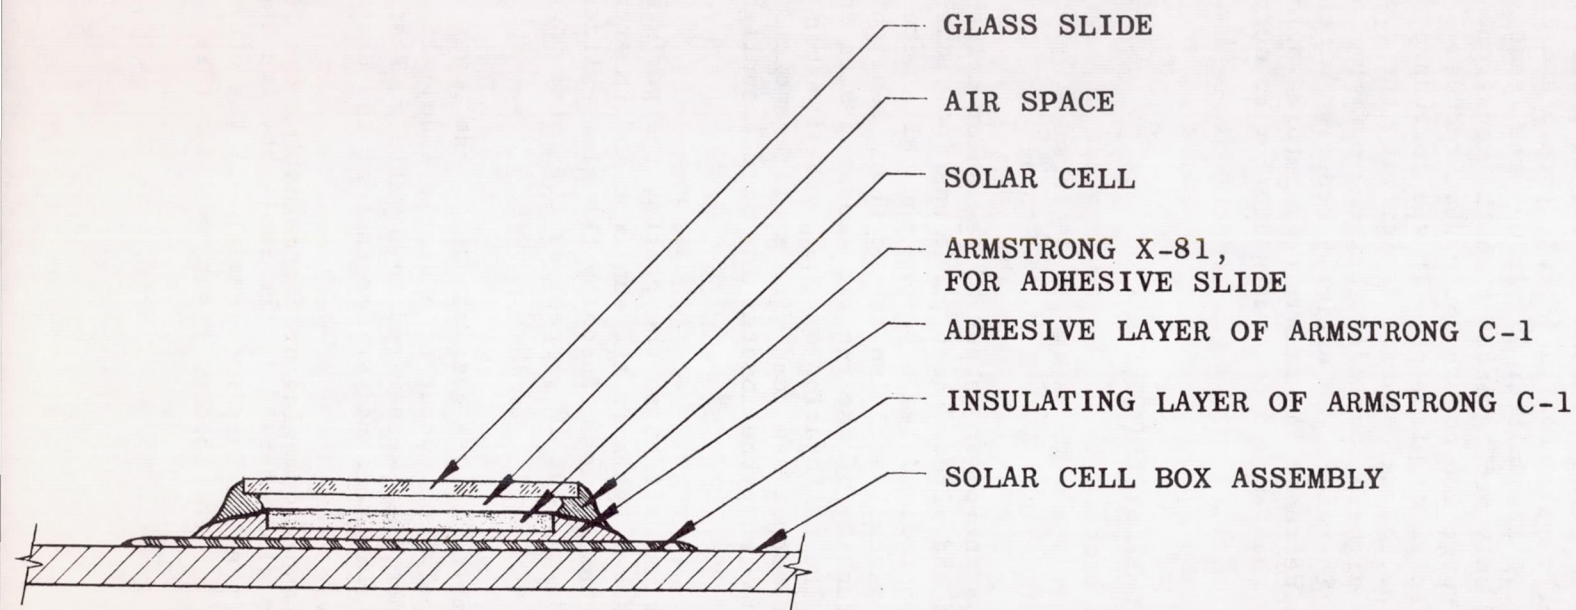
CROSS SECTION OF SOLAR CELL AND PROTECTIVE COVER MOUNTING
